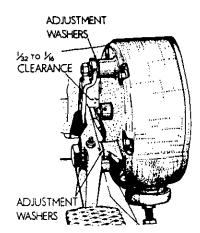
Use adjustment weshers as shown to adjust cam plate clearance.
